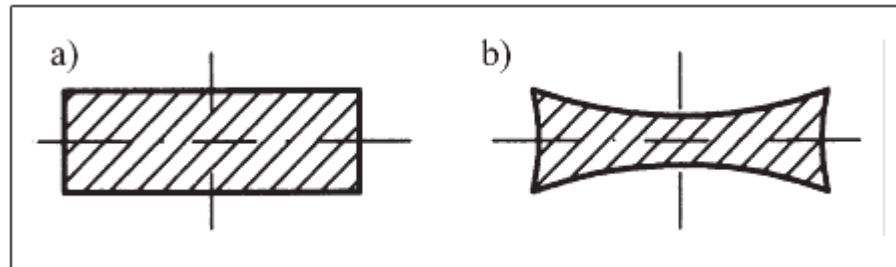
Cross-sectional area in the neck at fracture: a) before fracture, b) after fracture
